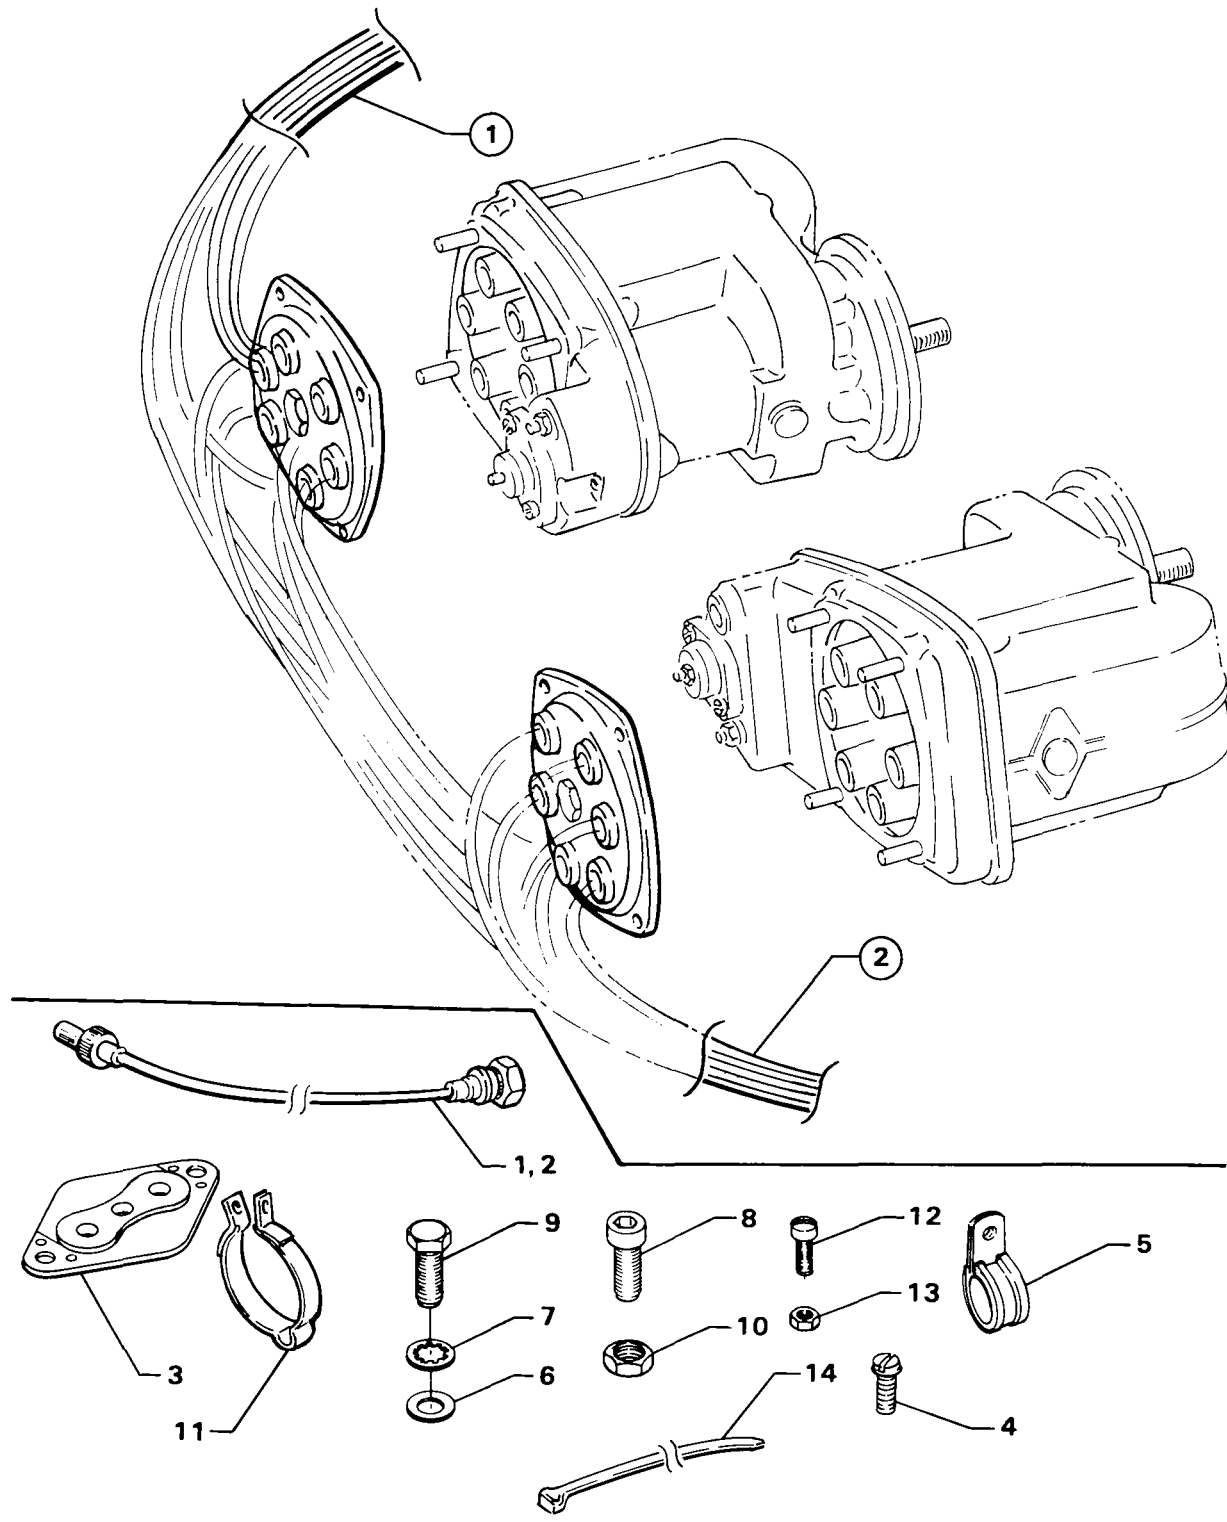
Ignition Harness and Lead Assembly (Textron Lycoming)
